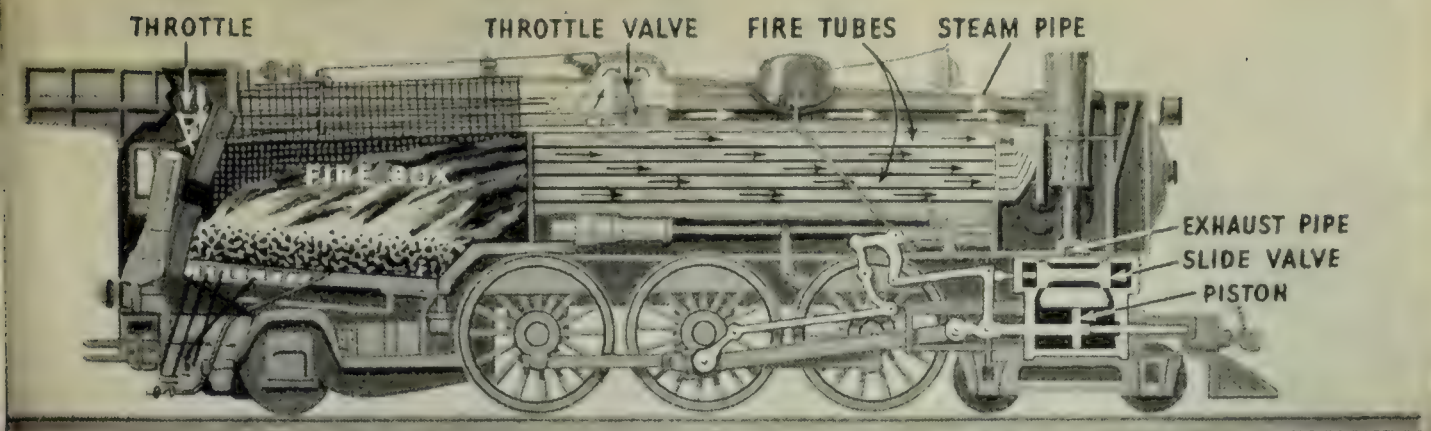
Study this drawing carefully and be sure that you can explain its parts. The sand dome is on the top of the locomotive between the throttle valve and the bell.
